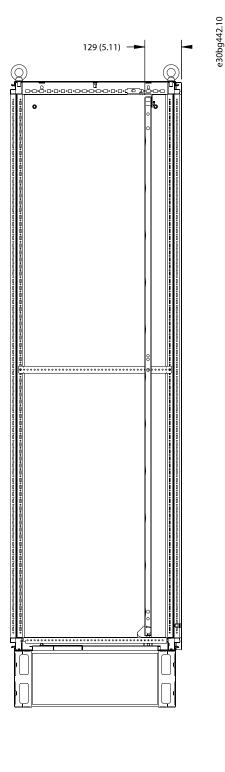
Mounting Plate Dimensions in D4h Enclosure
